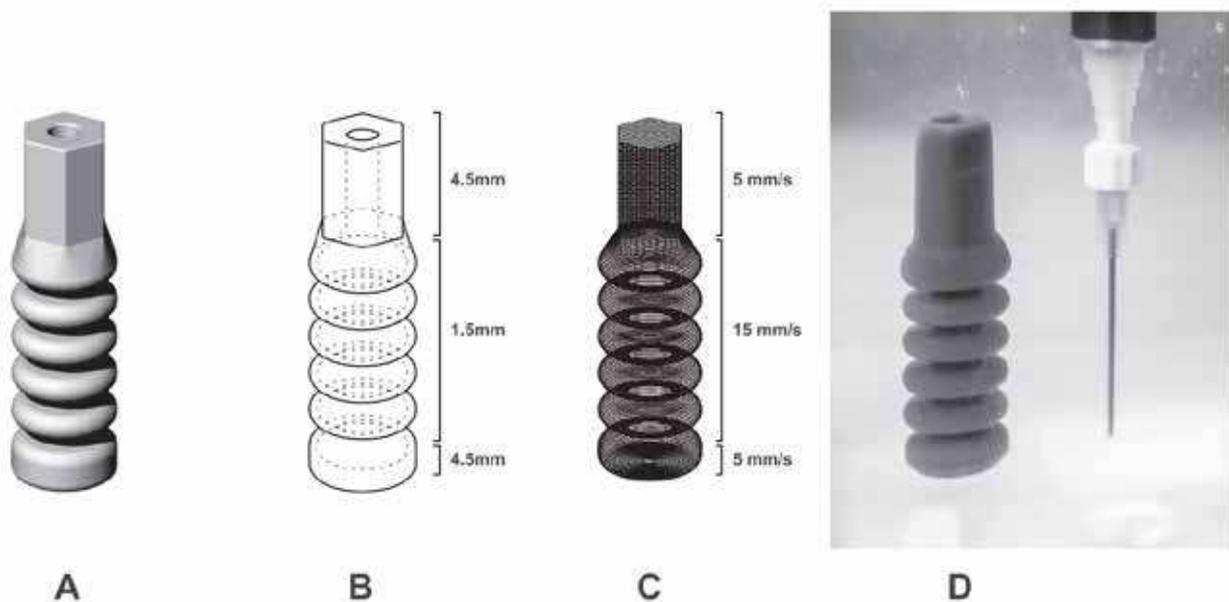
RLP Process A. CAD Modeling B. Sectioning C. Toolpath Generation D. Printed Actuator.
